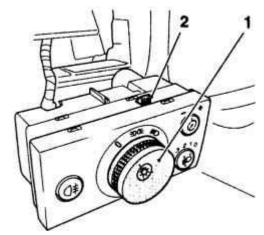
Velcro panel buttons moves up or down while turning the handle rotary switch: 1 - lever, 2 - retainer
